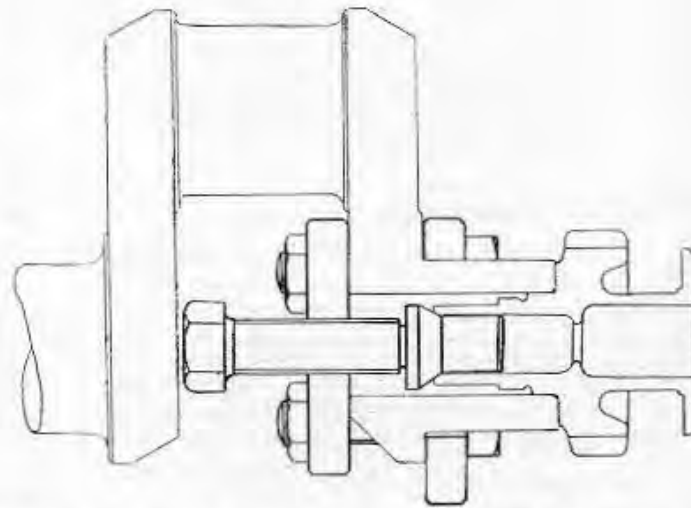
Withdrawing gear from crankshaft using extractor T1300-94
